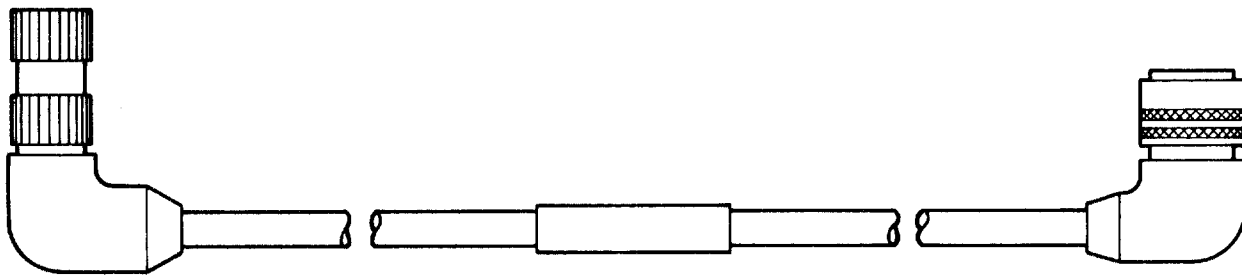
Adapter Cable Test Set (Sheet 2 of 4)
